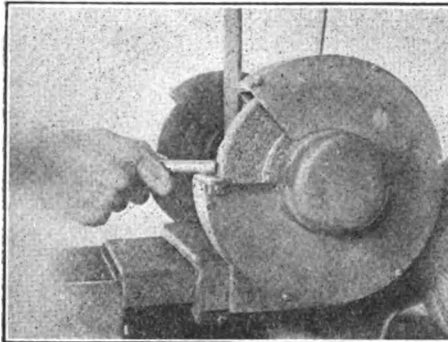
IMPROPER METHOD OF GRINDING ROUND STOCK WILL INJURE WHEEL
